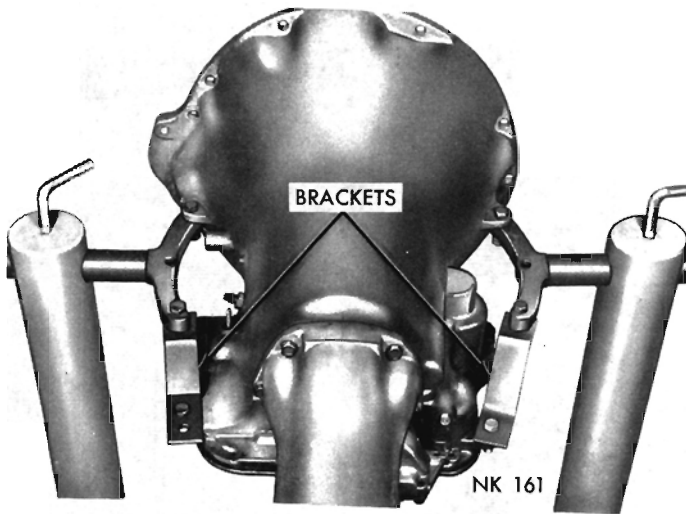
Transmission Installed in Repair Stand (Tool DD-1014)
